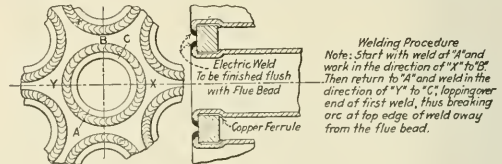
Procedure for Electric Arc Welding Flues
